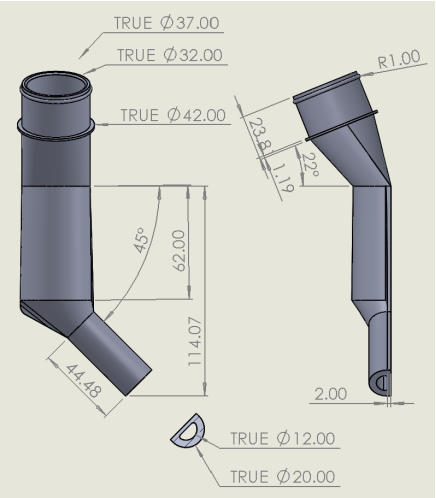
The SolidWorks design drawings for the 12 mm nozzle at angles 45°/135° with dimensions in mm.
